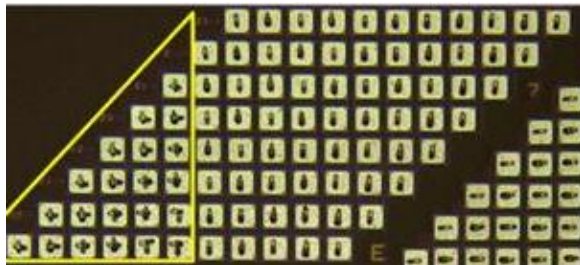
A portion of the experimental test chip with large probe marks on the pads seen after harsh probing. All pads to the right are probed in a single test of 6 touchdowns at 4mils overdrive. Highlighted on the left are cross-probed pads, harshly probed twice, with one scrub direction perpendicular to the other.
